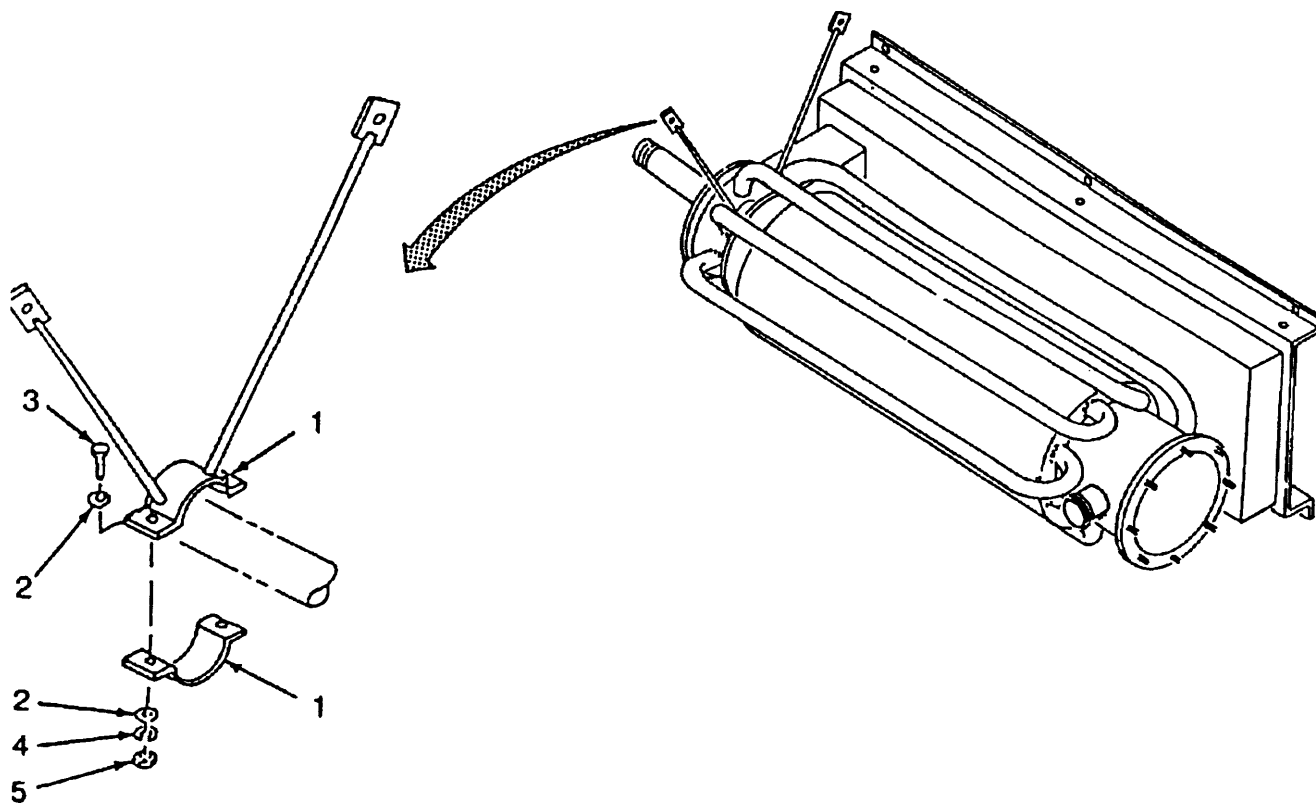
Heat Exchanger, (Model H120-1) Assembly
